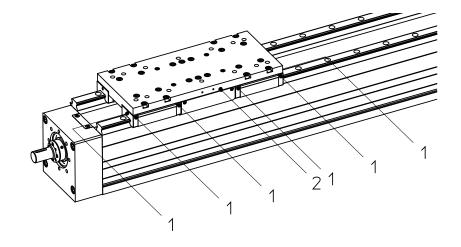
Possible lubrication points (1 and 2) on the carriage
